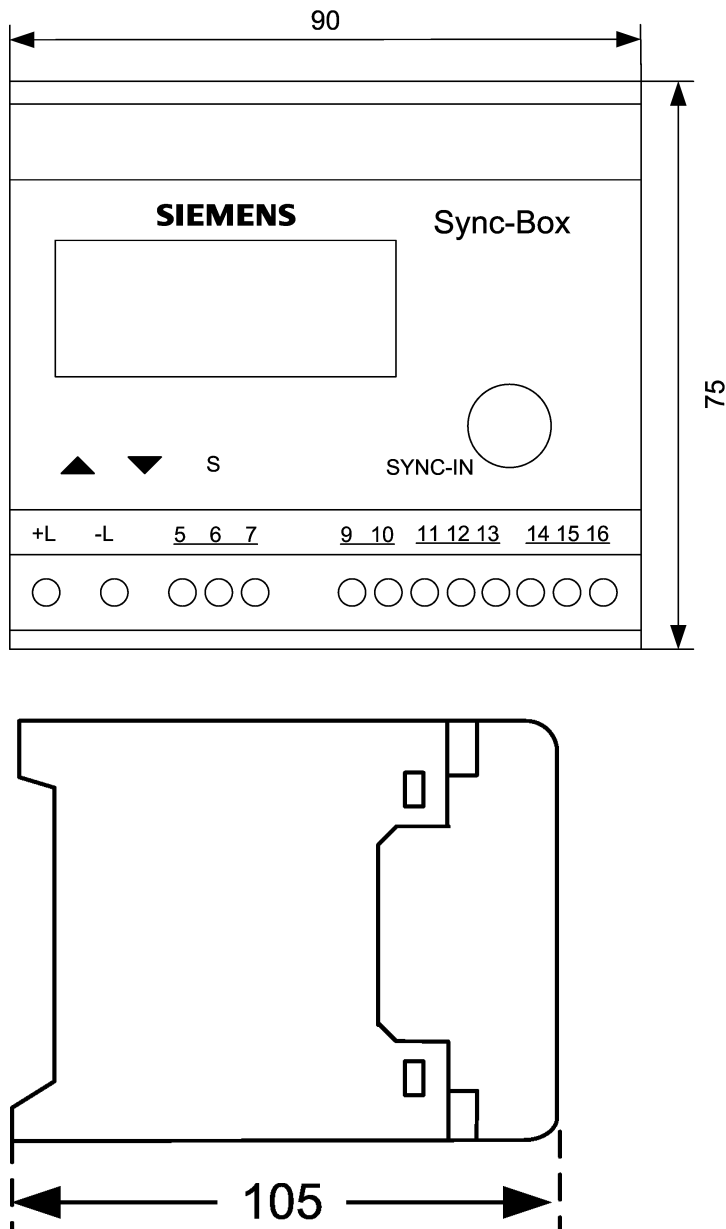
Dimension drawings of the Sync-Box (all dimensions in mm)
